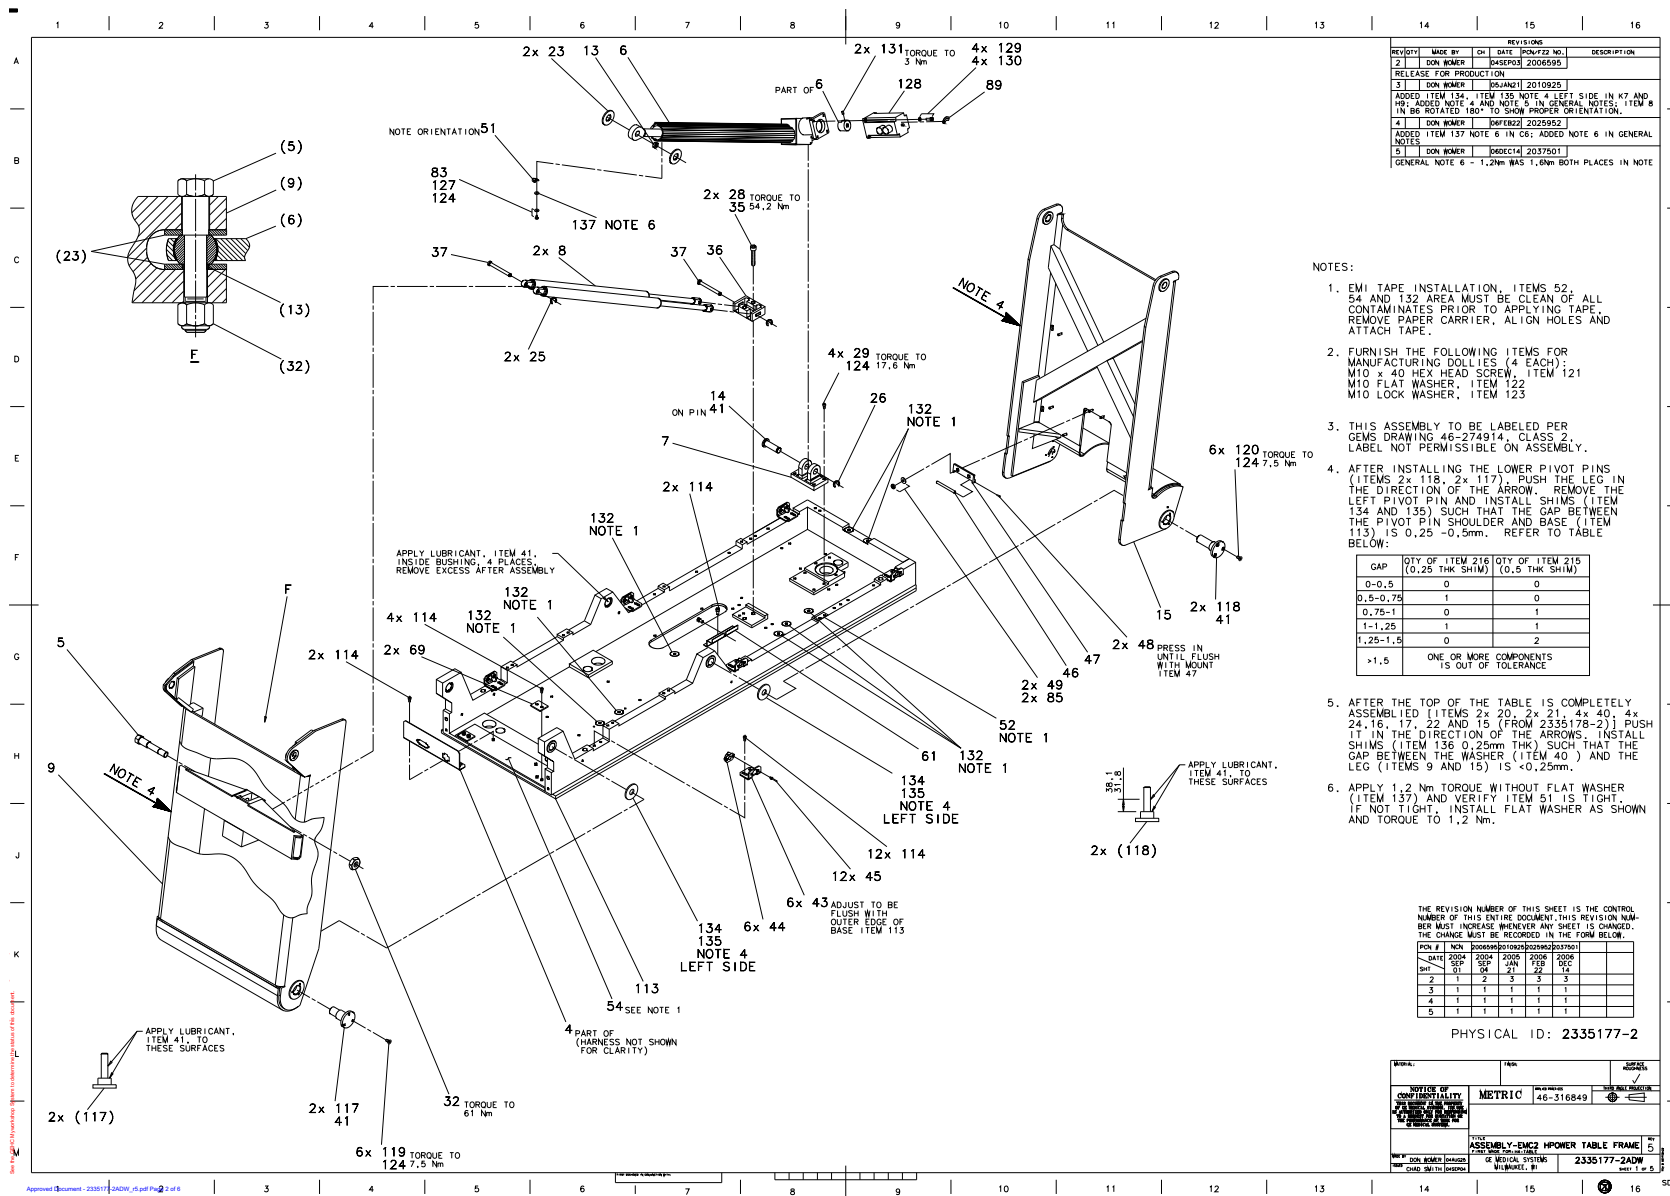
Table Frame Assembly (2335177-2, sheet 1, rev 5)
